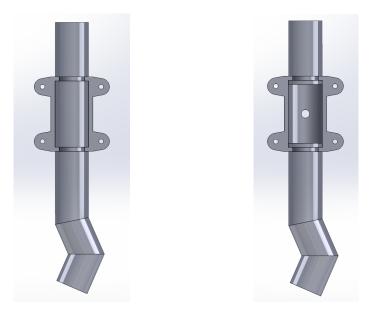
The internal shaft as a solid piece with half of the outer shaft clamped into its slots (left) and the internal shaft as two independently-moving pieces, held together by the outer shaft (right).
